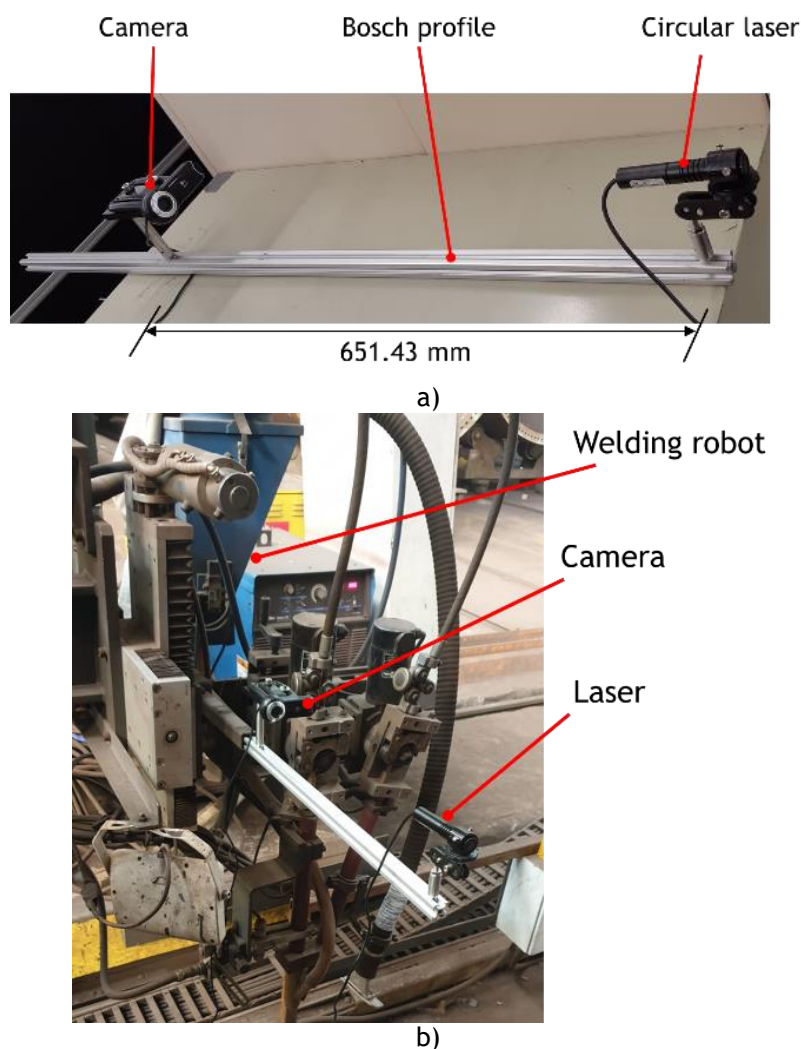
a) Adopted LSS for tower experiment and b) system mounted on the welding robot's arm.
